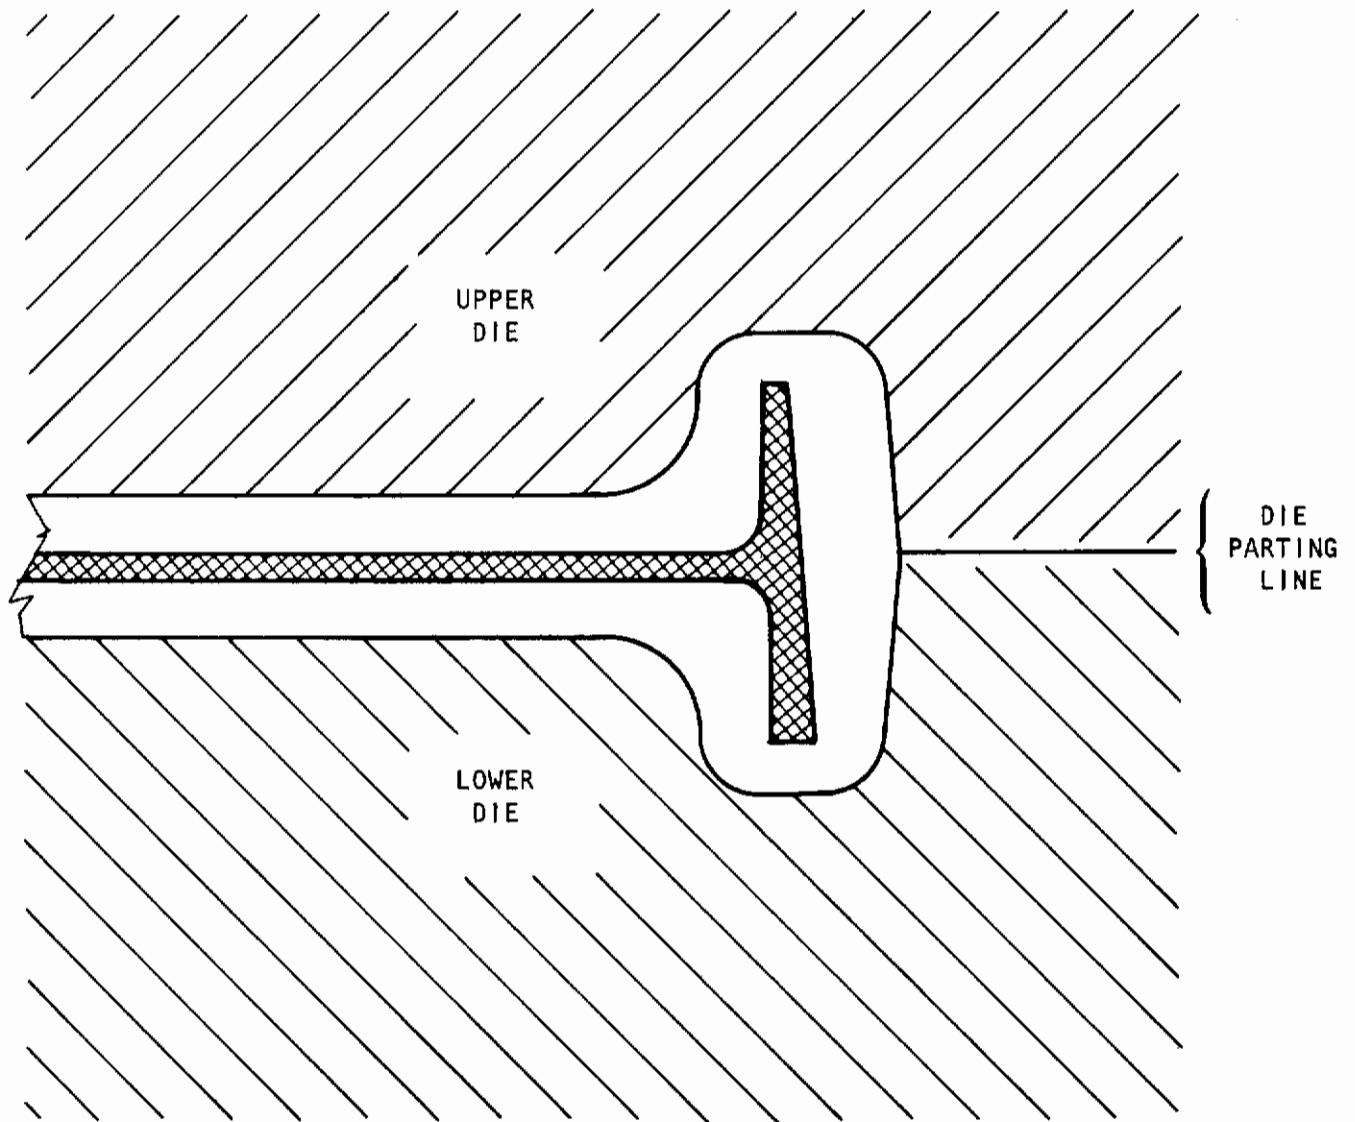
Schematic Illustration of Bulkhead Cross Section (at one end) and Die Parting Line Concept with Finish Forging Die Impression for 50,000 Ton Hydraulic Press Superimposed to Target Closure. Approximately Full Scale.
